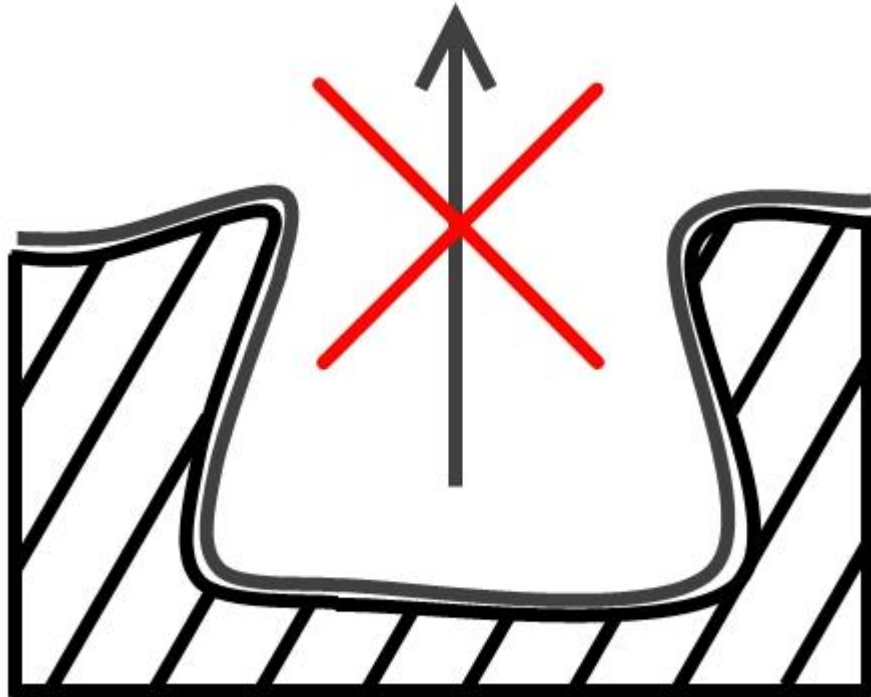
An example where the finished part would get stuck in the mould (the laminated part is in grey and the mould is in black)
